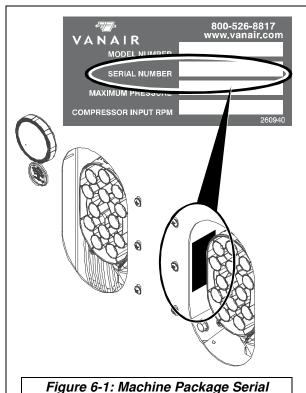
Machine Package Serial Plate / Serial Number Location
